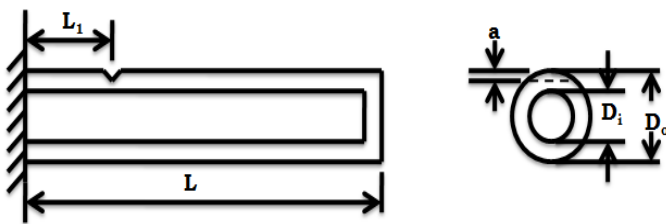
Straight Pipe with a Single Transverse Open-Crack
